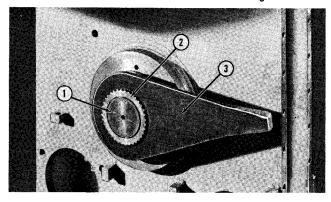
REMOVING LOCKNUT 1. Axle 2. Locknut 3.
